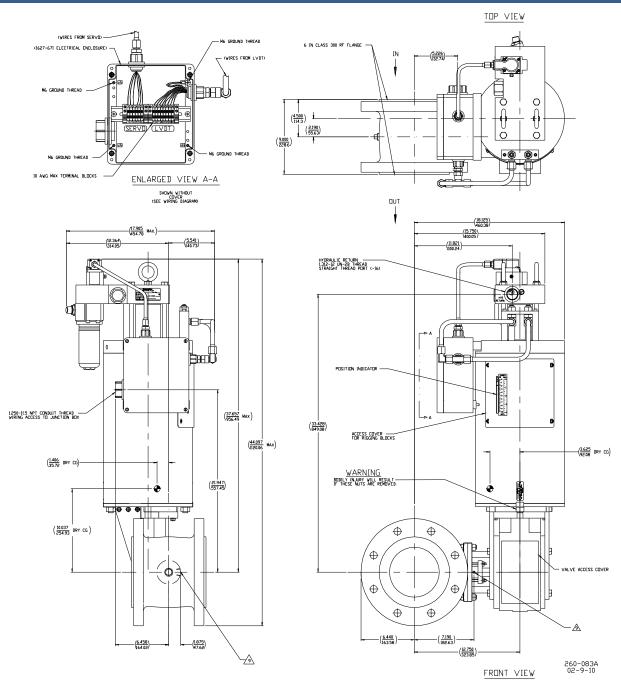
Gas Stop/Ratio Valve Outline Drawing (6-inch, SS-260)
